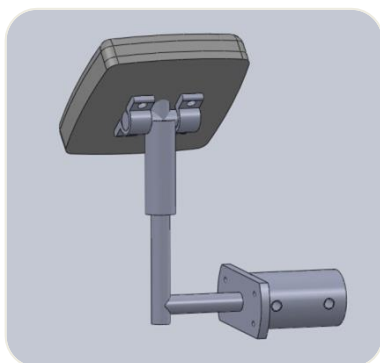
INITIAL FOOTPAD CONTROLLER PROTOTYPE
